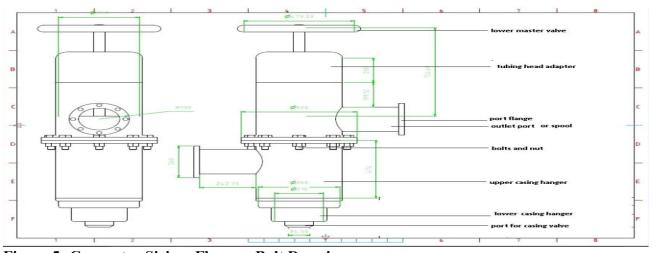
Connector Sizing, Flanges, Bolt Drawing
